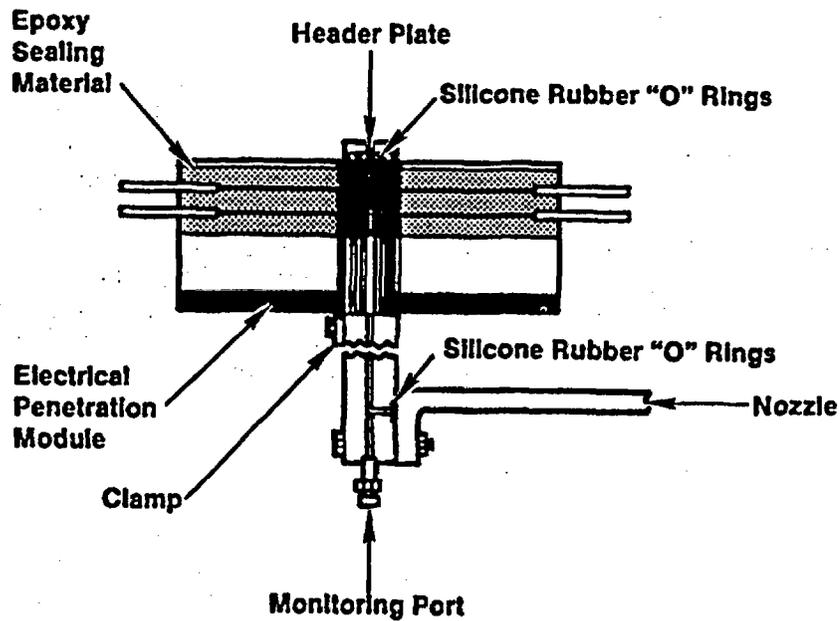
Typical Module for a Westinghouse Modular EPA¹²
